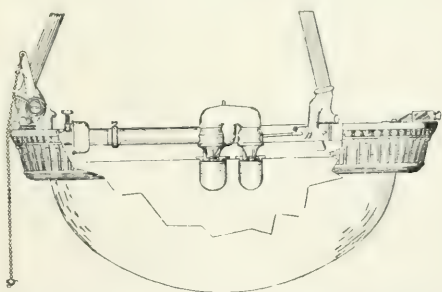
Section of bowl of a recently designed gas lighting fixture.
